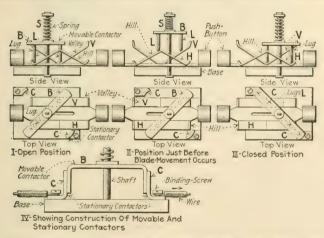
Illustrating the operation of the hill-and-valley snap-switch mechanism.
